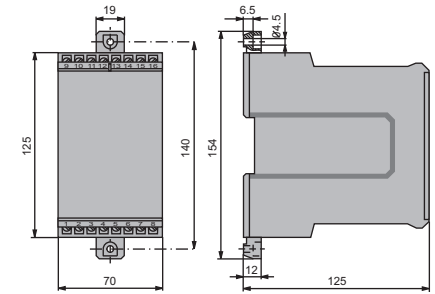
Fig.7 RISH Ducer C12 in housing E16 with the screw hole brackets pulled out for wall mounting.
